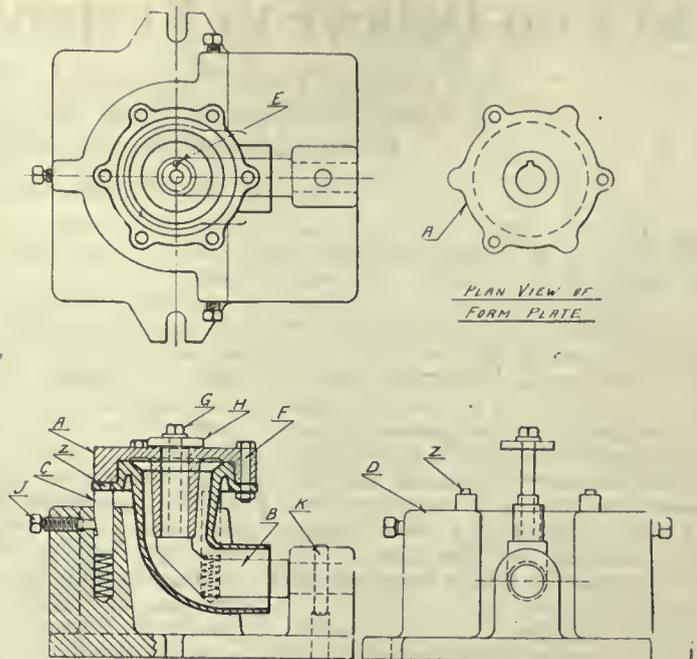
DETAILS OF PROFILE MILLING FIXTURE.
